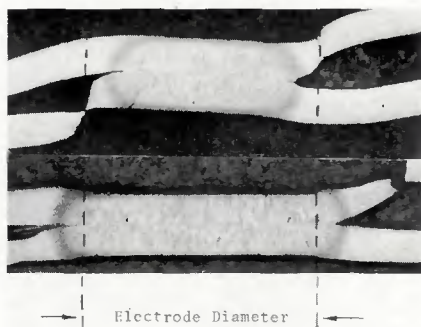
Welds made with different expulsion current settings. Note the failure location in relation to the electrode indentation and nugget diameter. Material—0.036 in. thick HSLA steel; electrode force—450 lb (2 kN); weld time—12 cycles; electrodes—0.25 in. diameter 30 deg FF. Nital etch, X10 (reduced 50% on reproduction)
